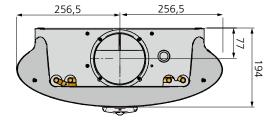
Dimensions ADRIATIC VAV Ellips, end view air connection
